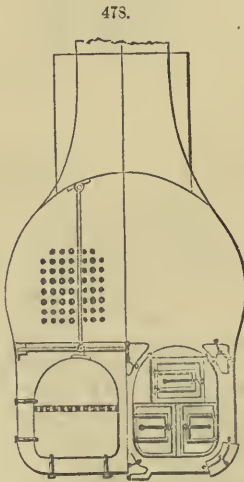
, 478, and 479, represent a boiler, by Messrs. Miller, Ravenhill & Co., of the tubular
